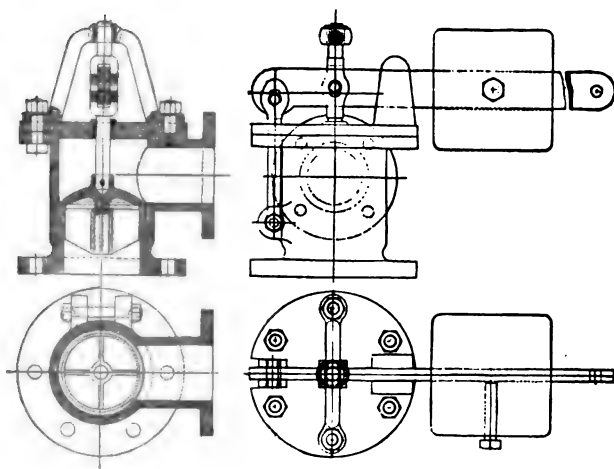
LEVER SAFETY-VALVE (U. S. BOARD OF INSPECTORS).
